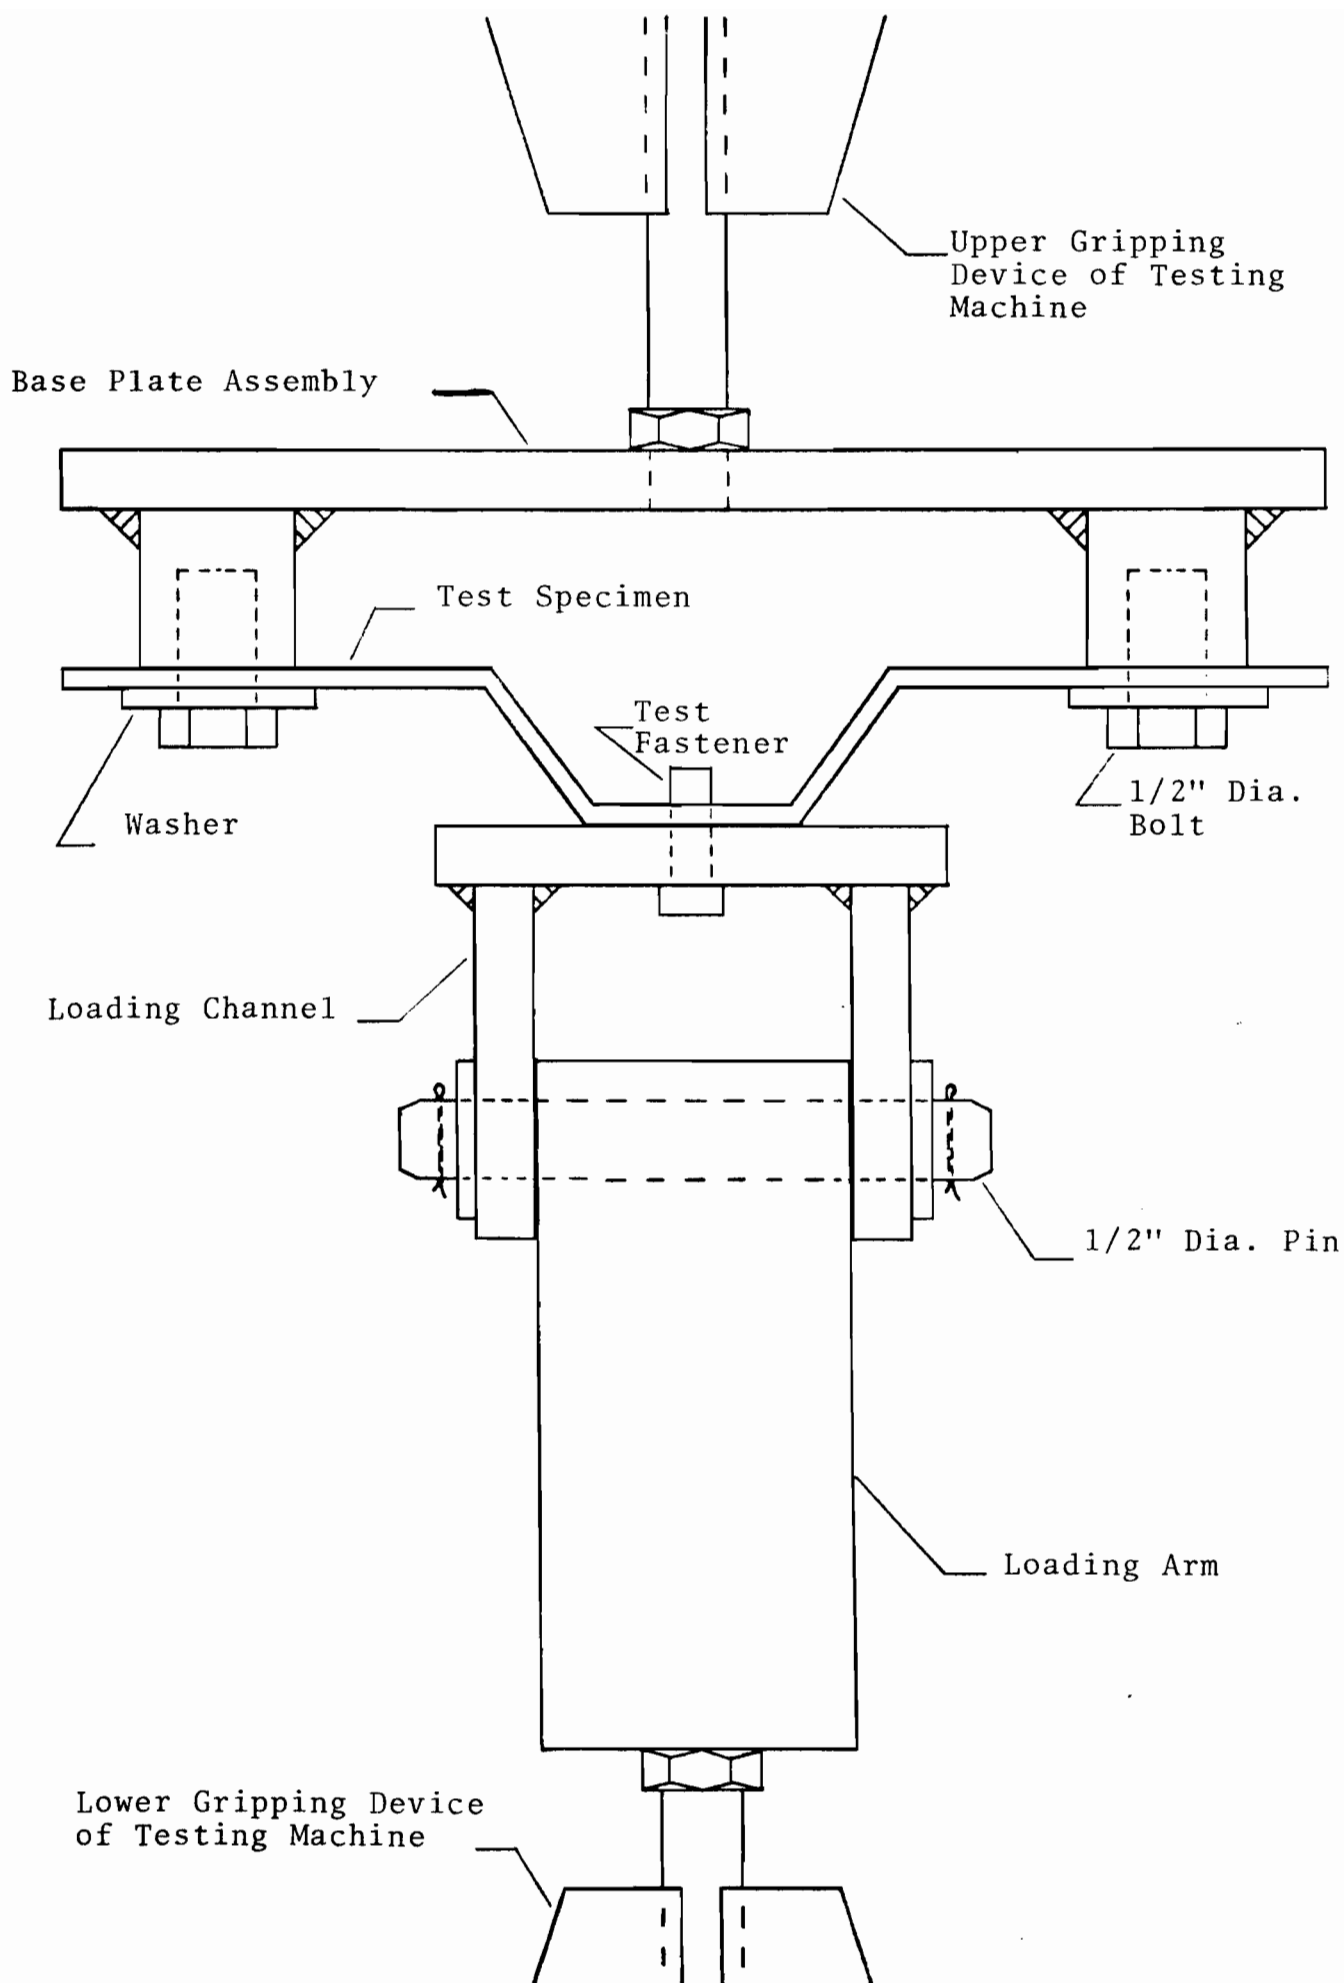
UPLIFT TEST FIXTURE FOR PULL-OUT TEST WITH SPECIMEN INSTALLED
